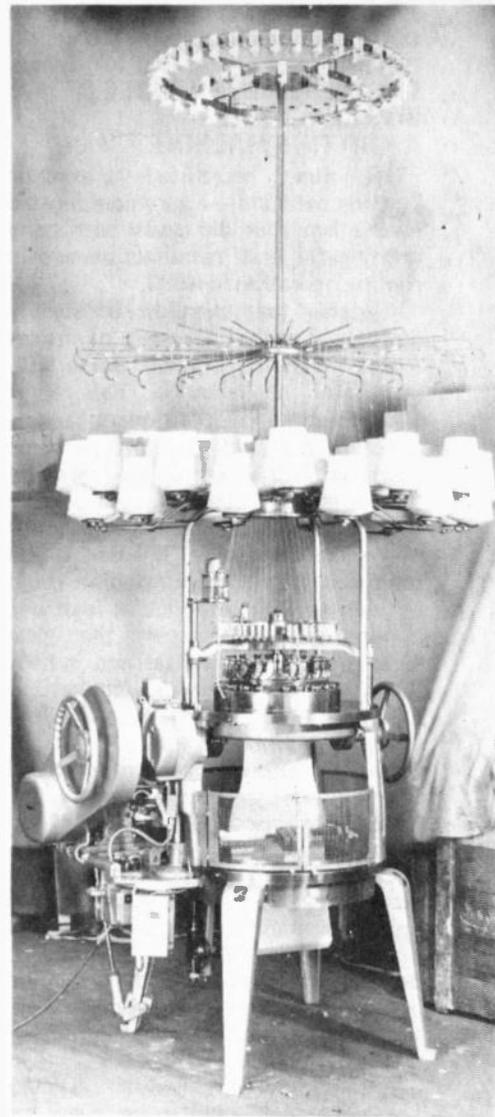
Cropped-discs assembled on an arbor are used by one manufacturer to control the pattern produced by a knitting machine.
